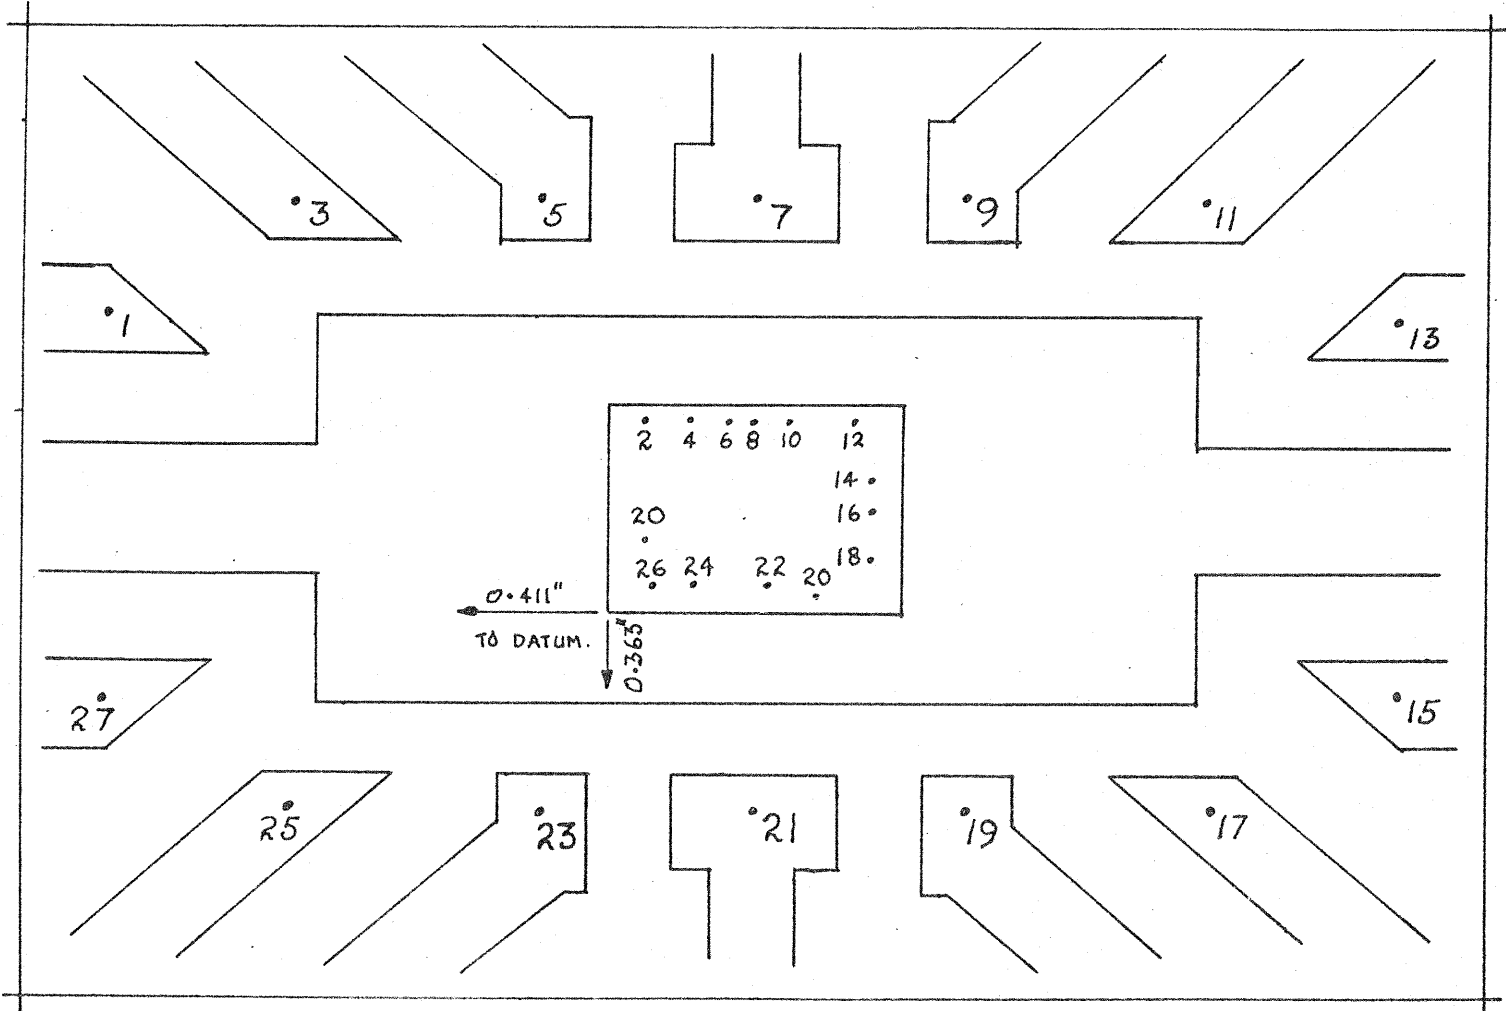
DRAWING OF PROPOSED SINGLE HEAD BONDER
